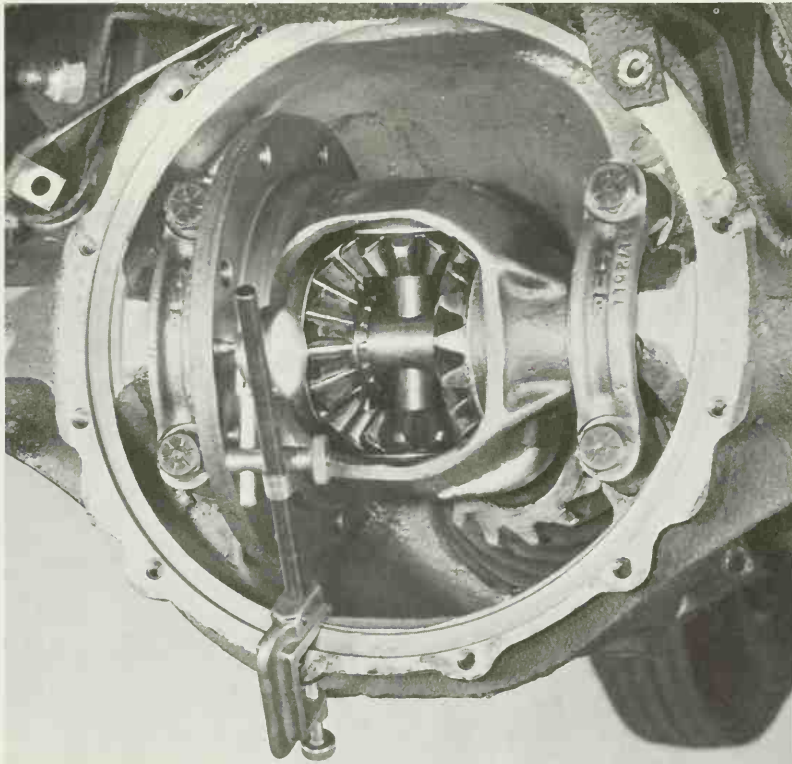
A dial indicator is used to check differential case bearings end play and runout. (American Motors Corporation)
